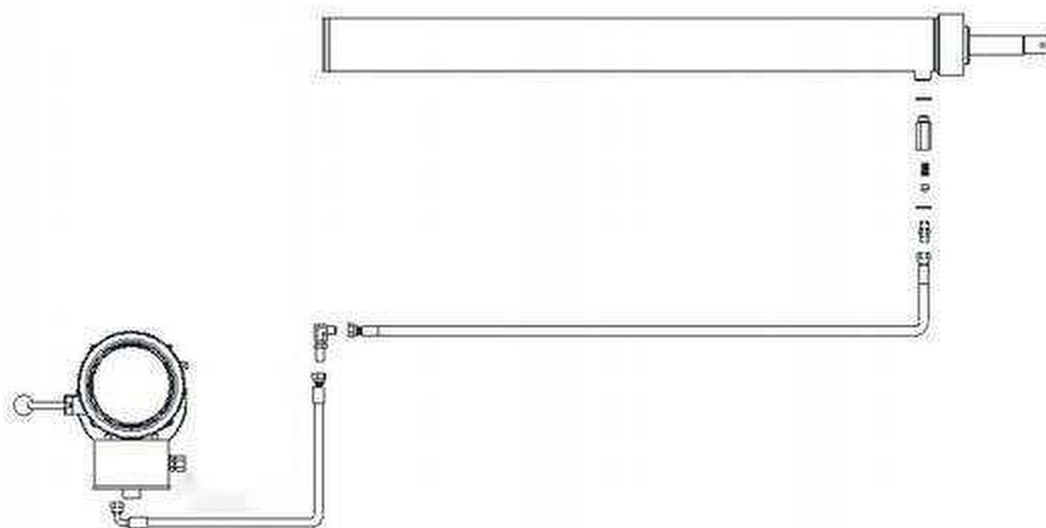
Hydraulic hose routing from the power unit to the cylinder
